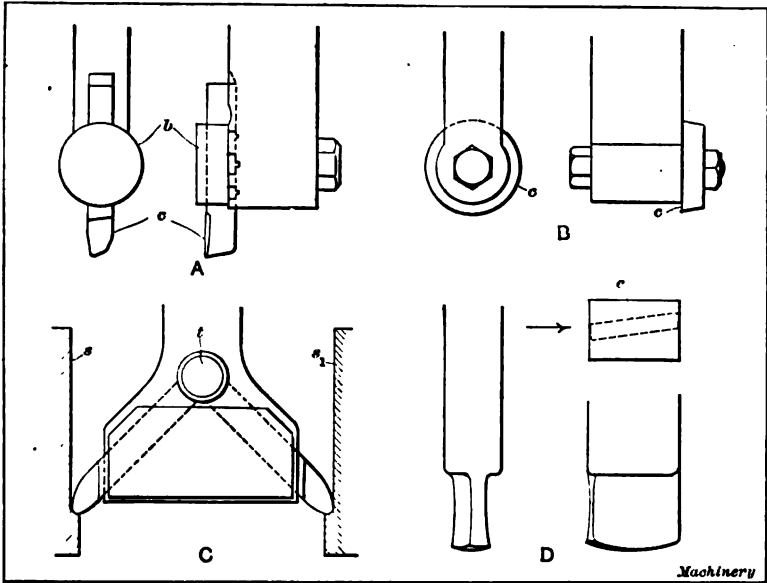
(A) Planing Tool with Inserted Cutter. (B) Radius Tool
